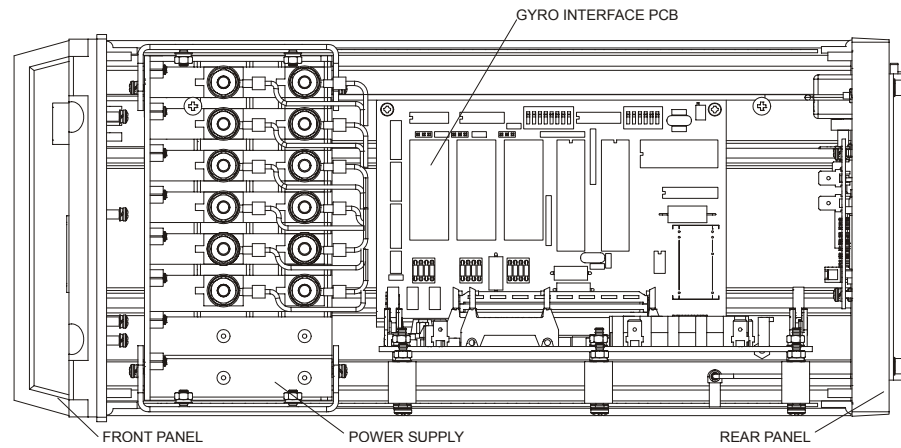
Electronic Chassis (Left View - Looking Toward the Gyro Interface PCB)
